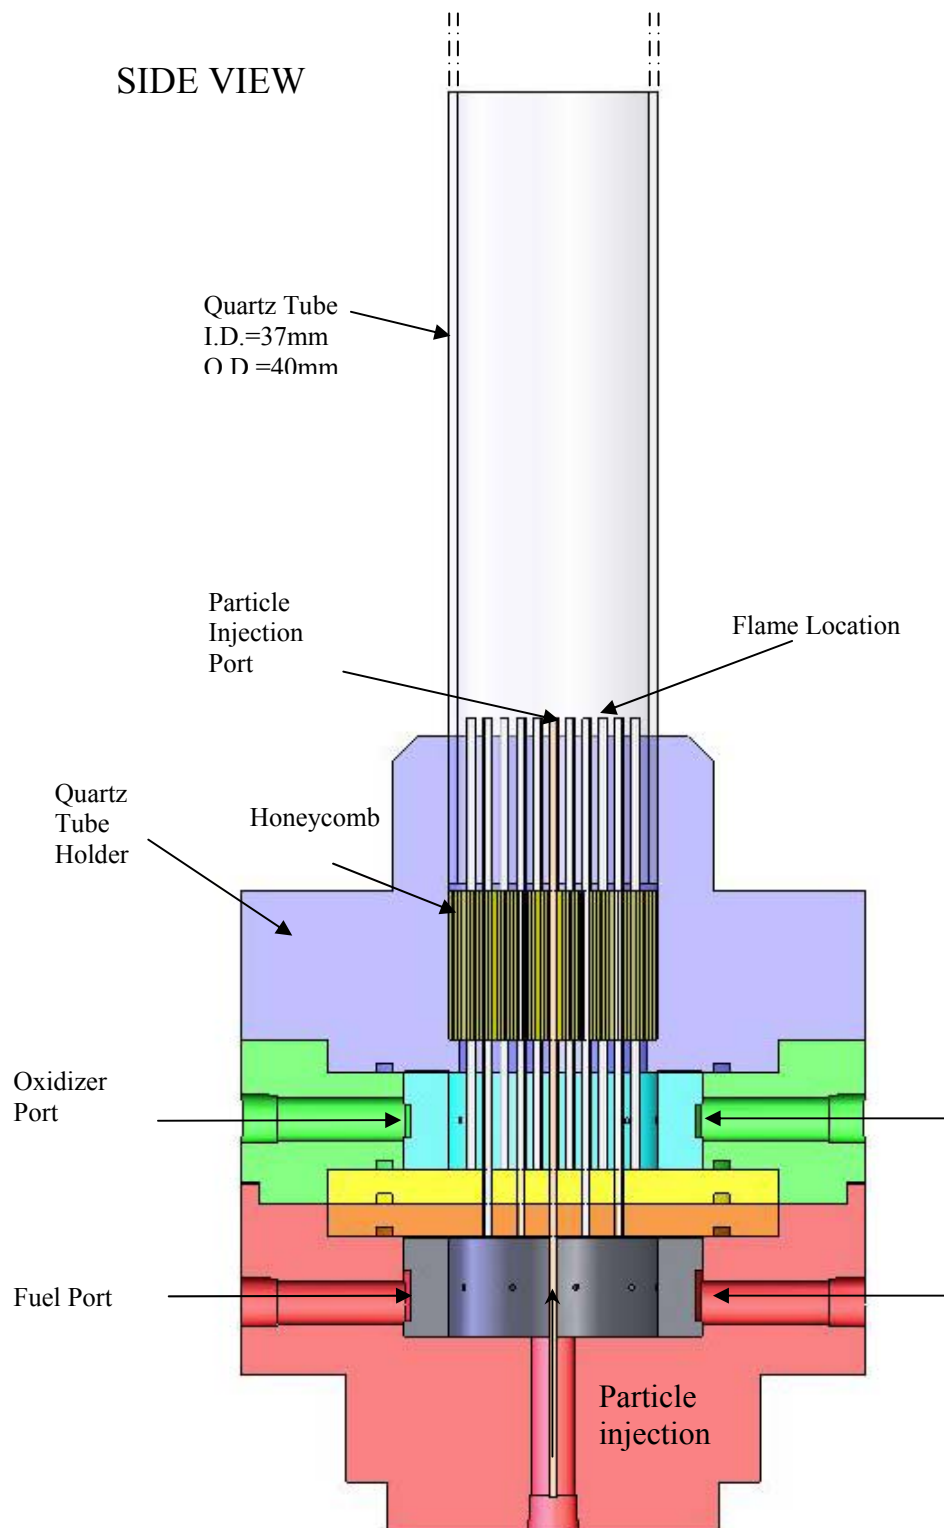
A cut-away side view of a modified flat-flame Hencken burner.
